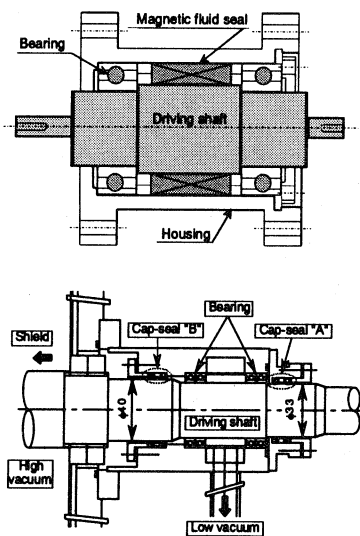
Sectional view of the vacuum seal part around the new driving shaft (upper) and the old (lower).
